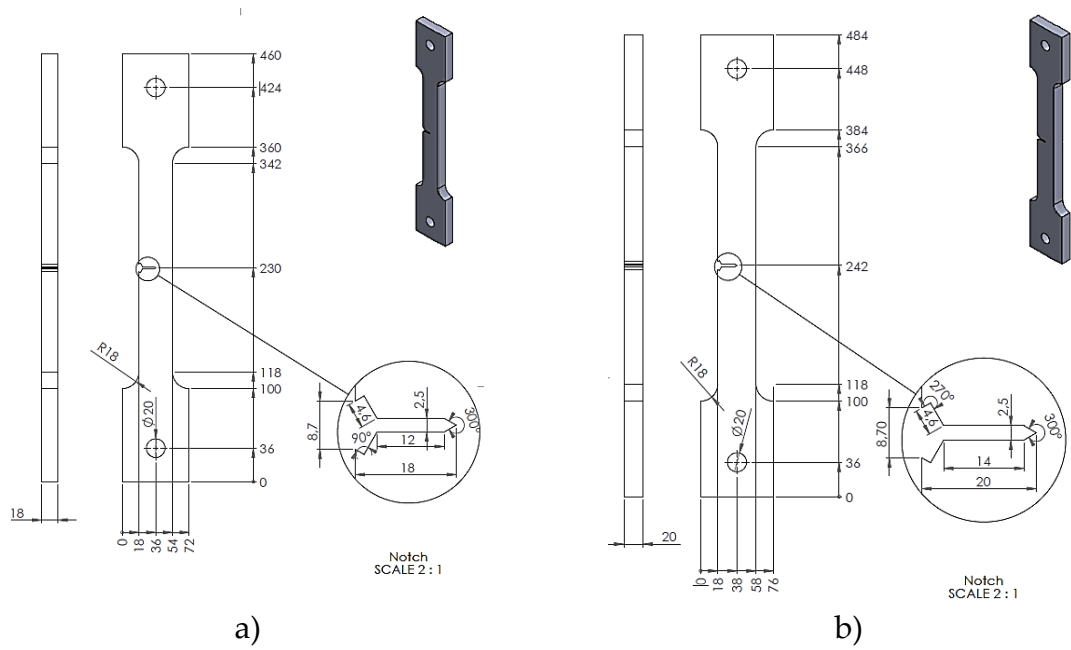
Single edge notch tension, SENT, specimen, a) valve and b) pipe.
